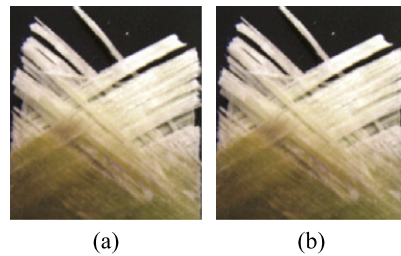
Tow parts of a damaged tube: (a) outside part, (b) inside part.
